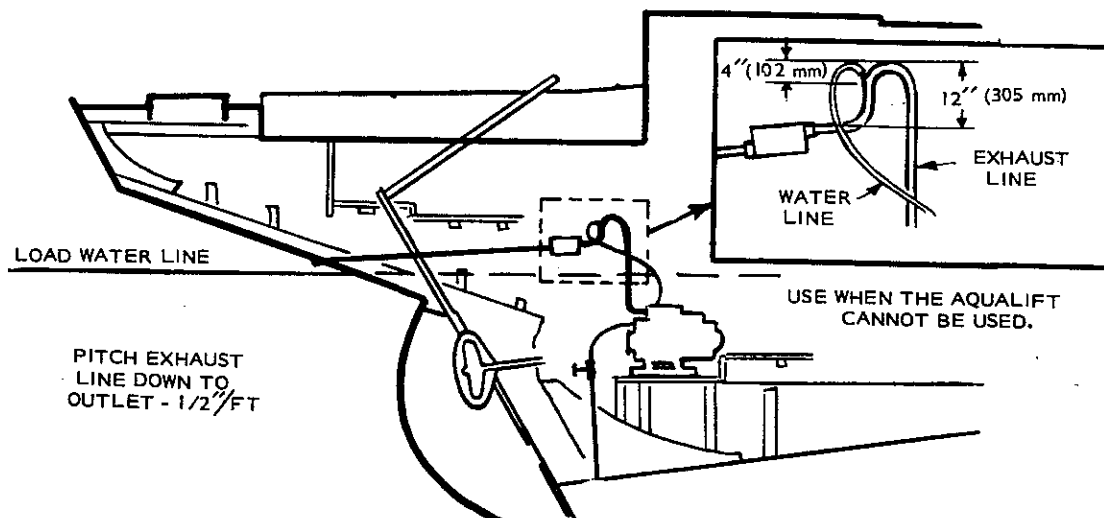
TYPICAL BELOW-WATER-LINE INSTALLATION, USING A RISER SYSTEM
